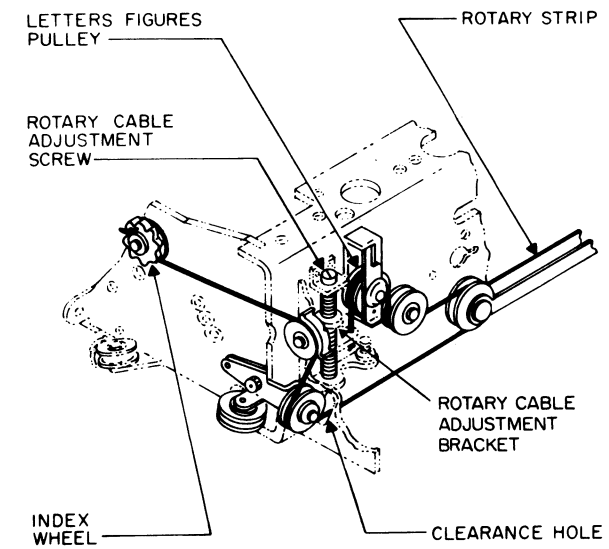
Rotary Cable Installation, Cable Threading Diagram
